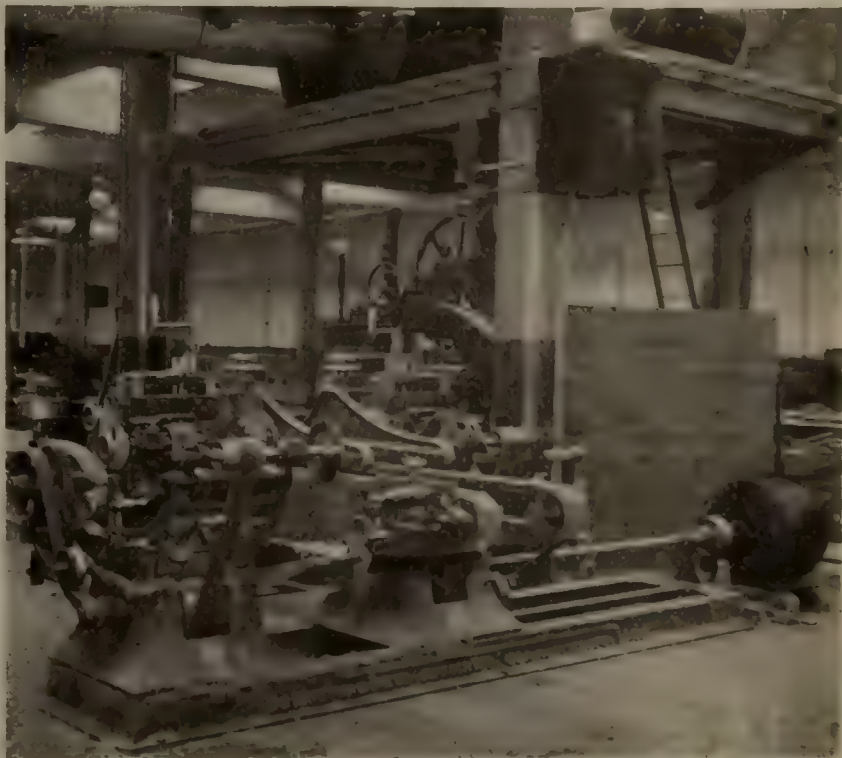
Application of Motor to Tenoning Machine in Wood Working Shop.
